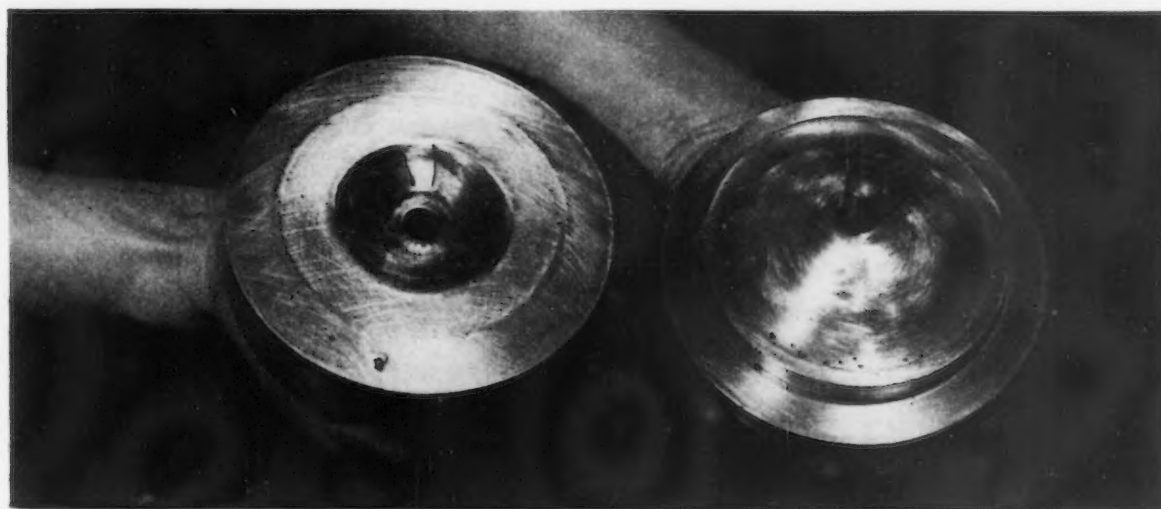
While these experimental Cerrobend dies will melt in boiling water, after chilling they can withstand stamping pressures and produce up to 250 parts before rechilling is necessary.
